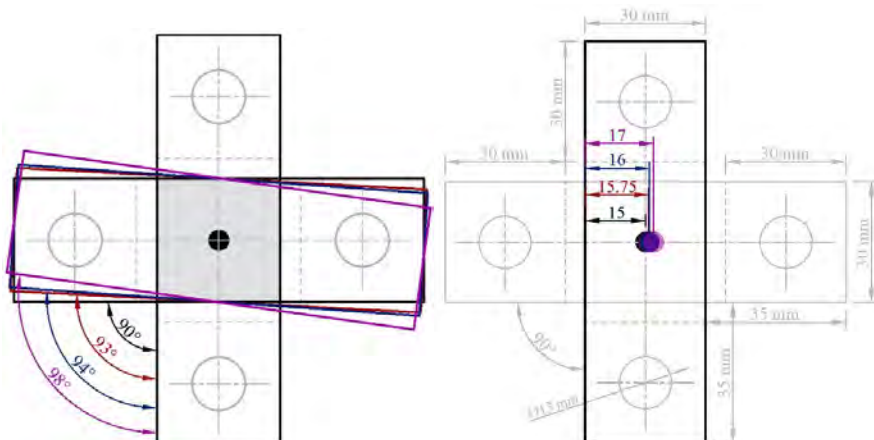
C-T angular misalignment deviation sample geometry drawing on the left and spot weld displacement deviation sample geometry drawing on the right.
